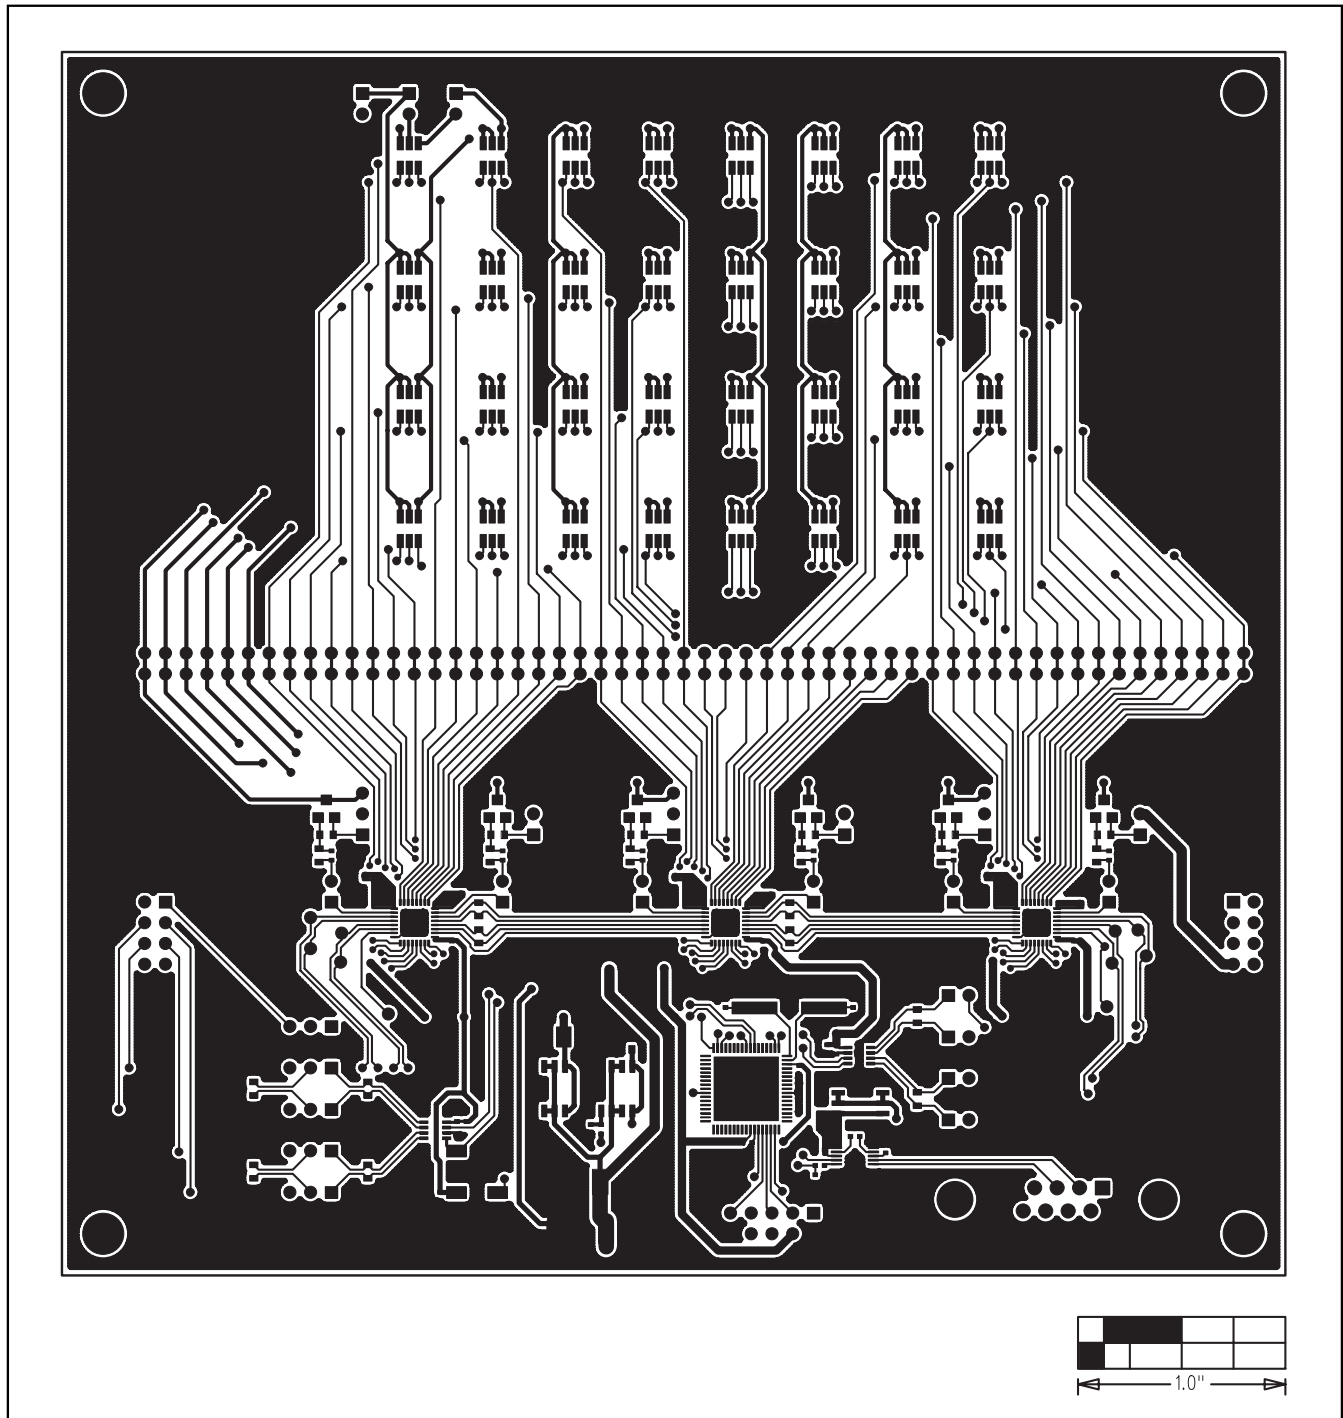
MAX6972 EV Kit PC Board Layout—Component Side
